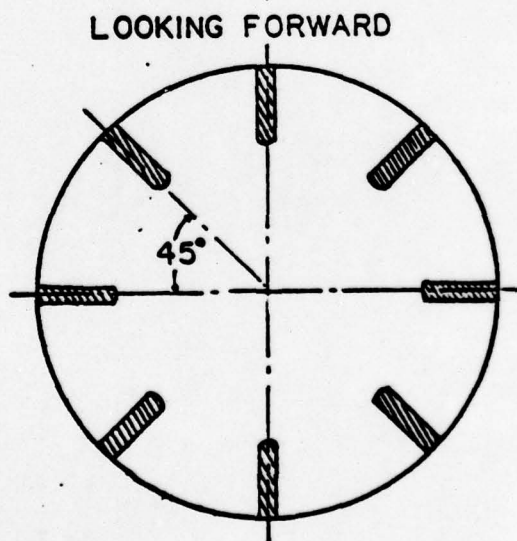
Envelope Reinforcement for Multi-Configuration Empennage
